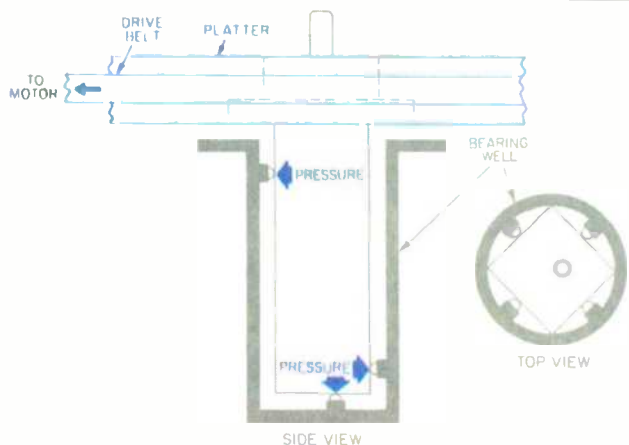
Cross section and top views of the turntable shaft bearing. Tension on the drive belt presses the thick shaft against the thrust bearings on the sides of the shaft well.
